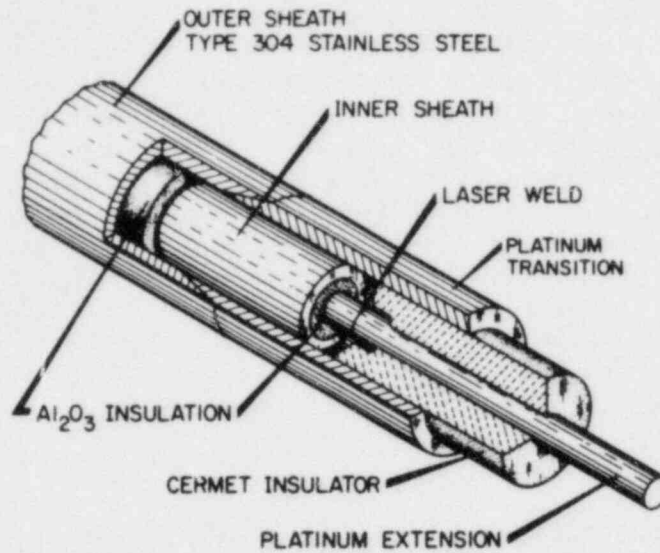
Design of end seal for 3.18-mm-diam (0.125 in.) stainless steel triaxial cable.
